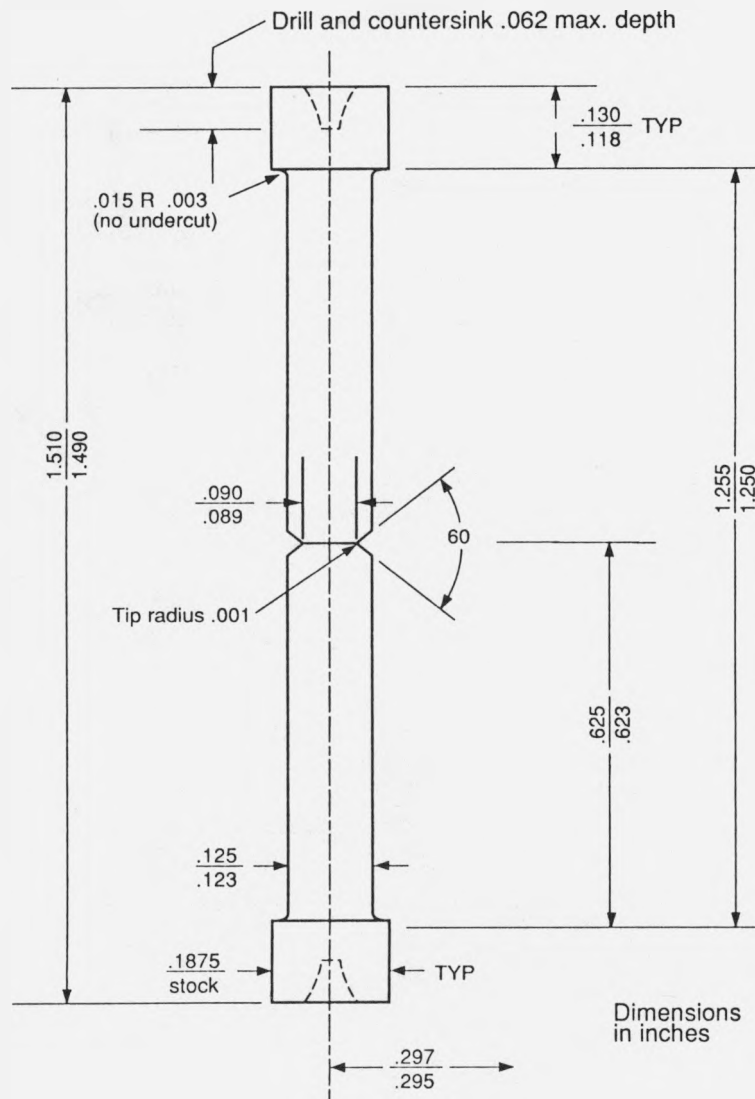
Round notched tensile specimen machining specifications. Samples to be tested in the as-machined condition.
